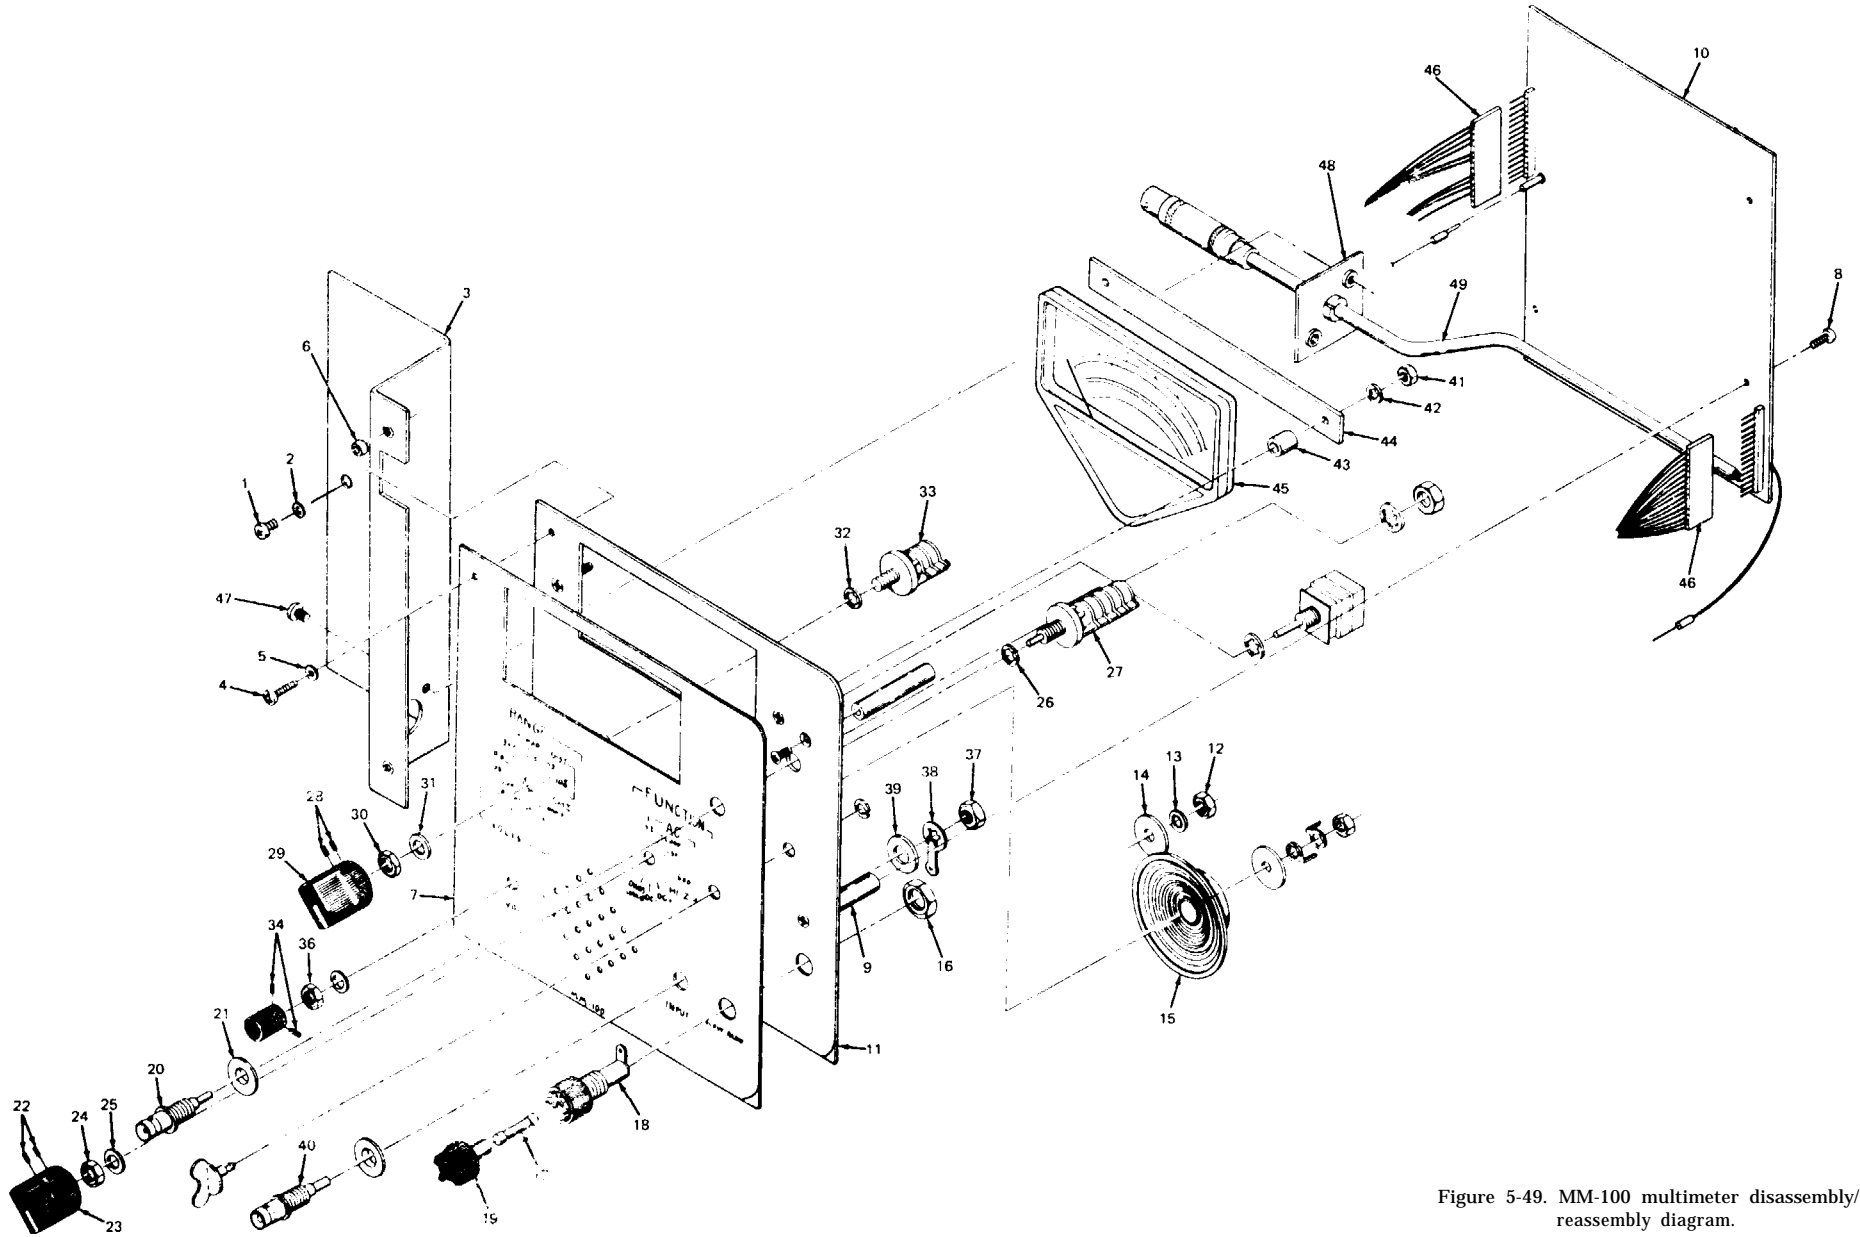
MM-100 multimeter disassembly/reassembly diagram.
